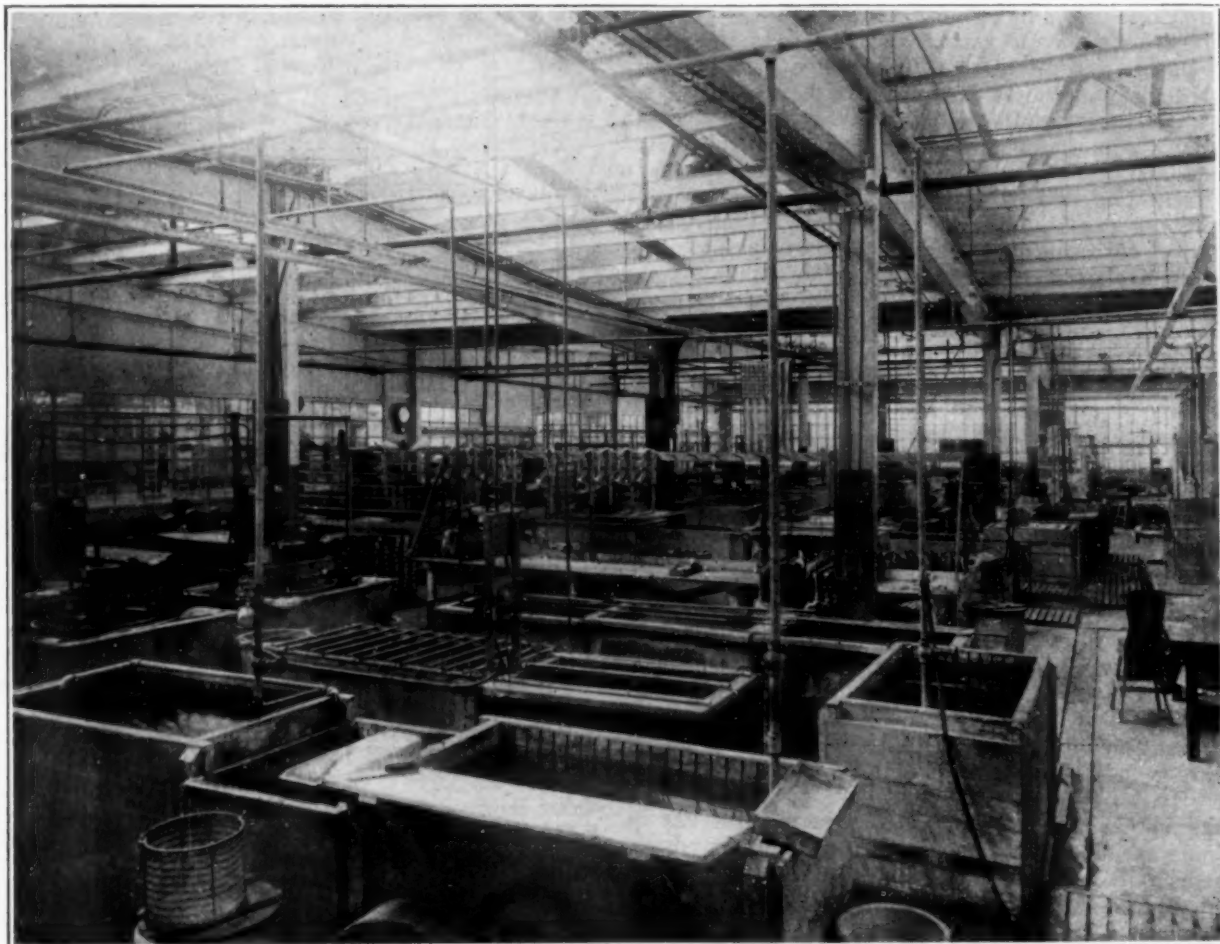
GENERAL VIEW OF A MUSICAL INSTRUMENT PLATING DEPARTMENT.
